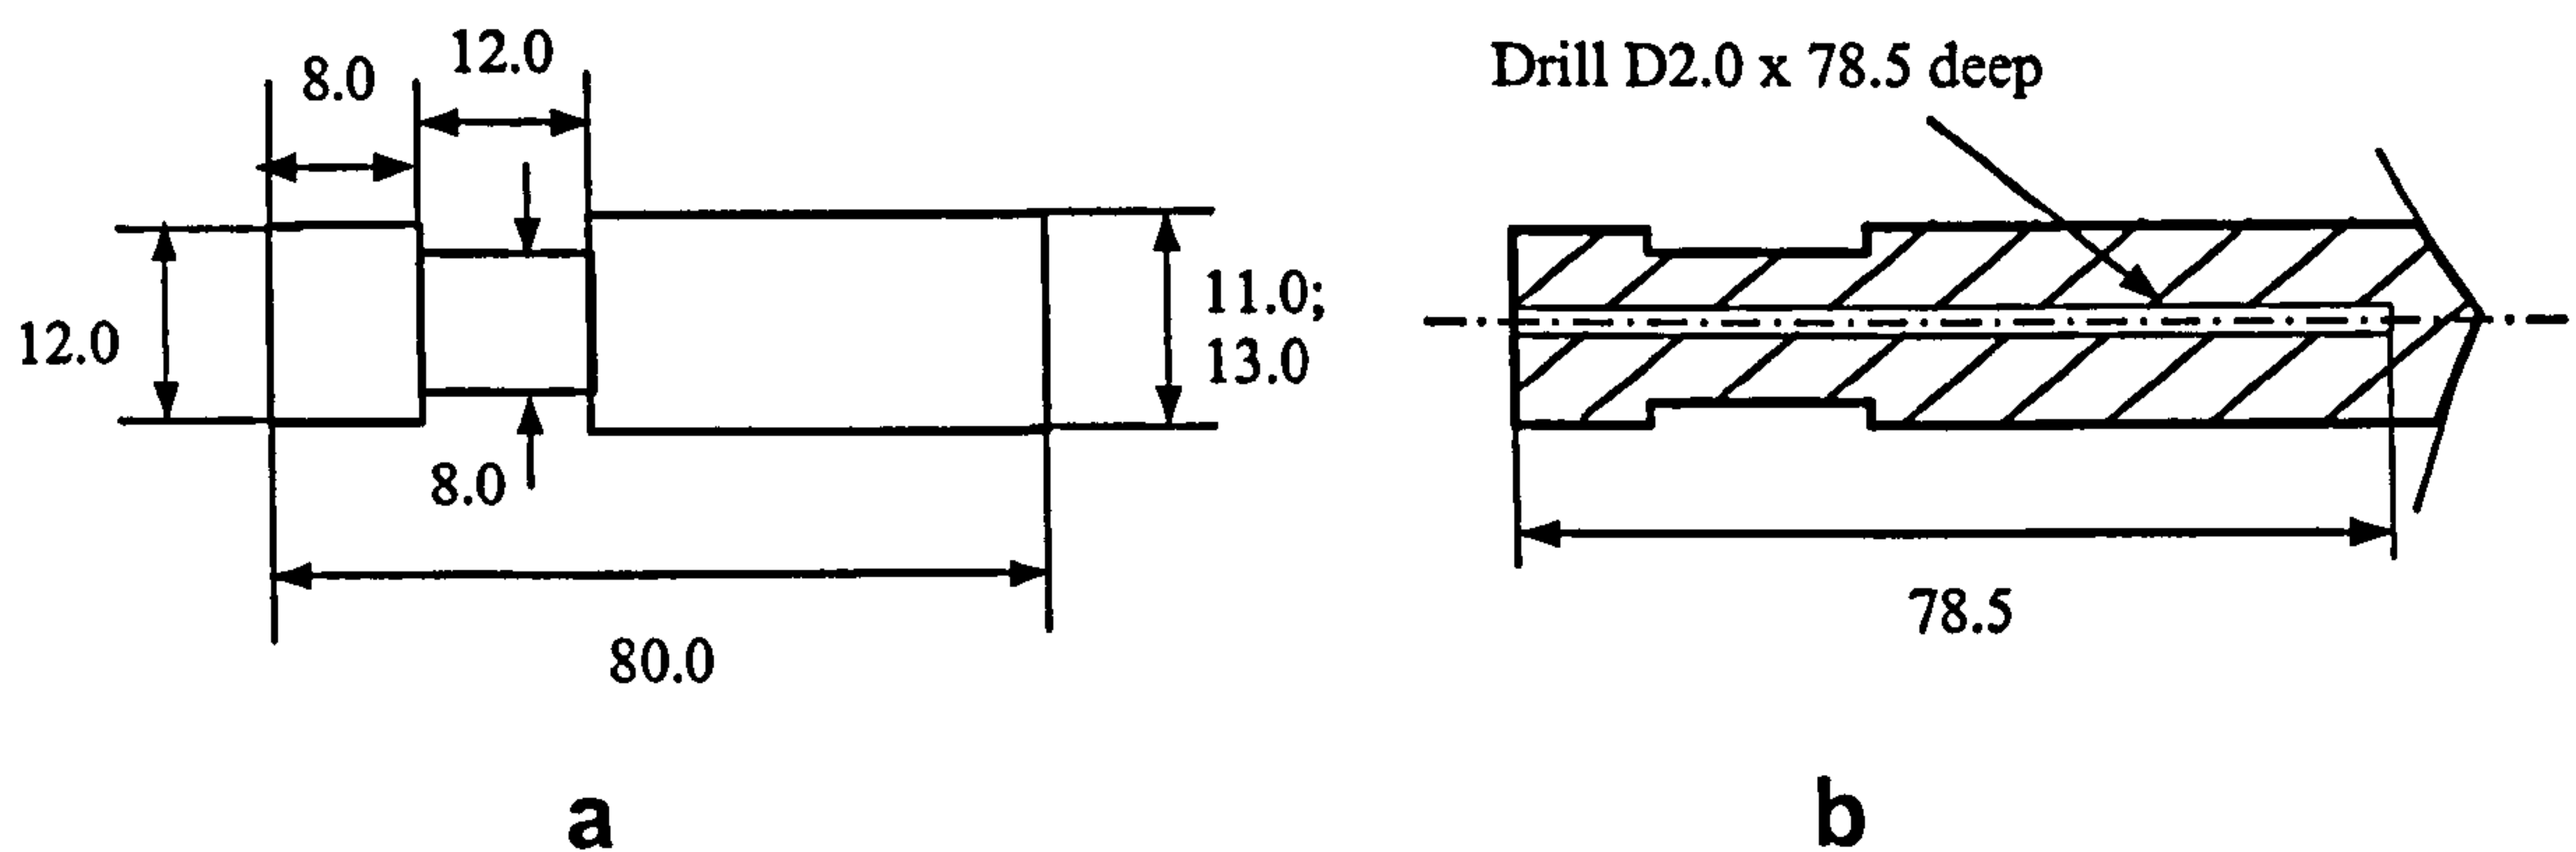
a) geometry of the compression specimen and tool and b) position of the groove (all dimensions in mm).
